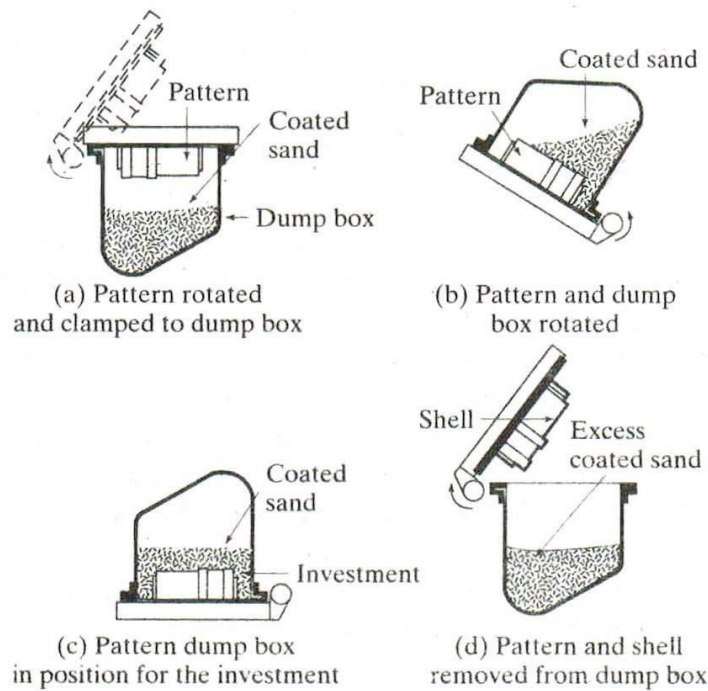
A common method of making Shell Molds (Dumpbox technique)
